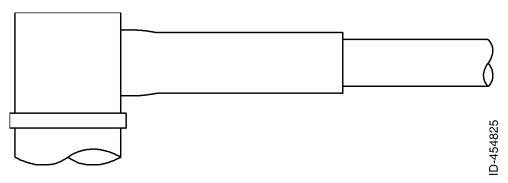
Coax Cable and BNC Heat Shrink Location
